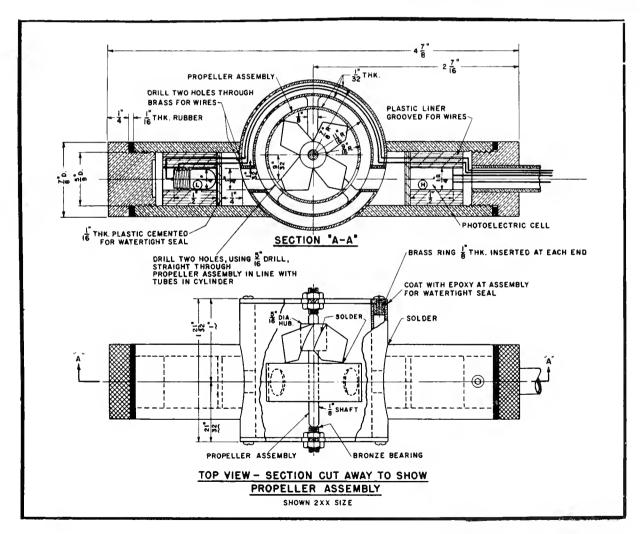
Detailed drawings of the portion of the rod assembly housing the bulb, photoelectric cell, and propeller.
